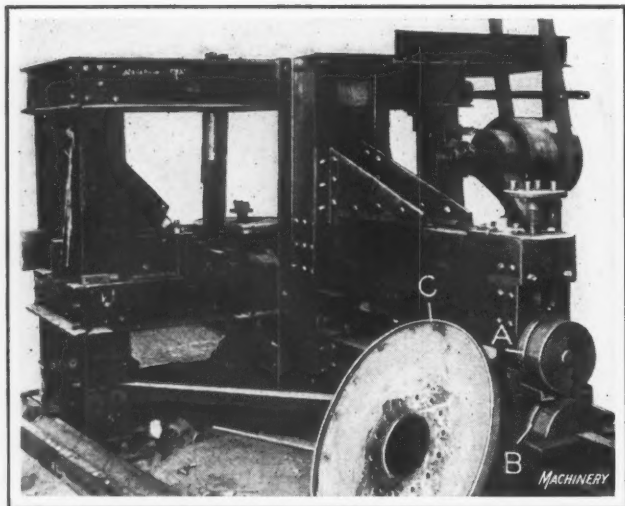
Machine for cutting and flanging Disks for Trailer Wheels
